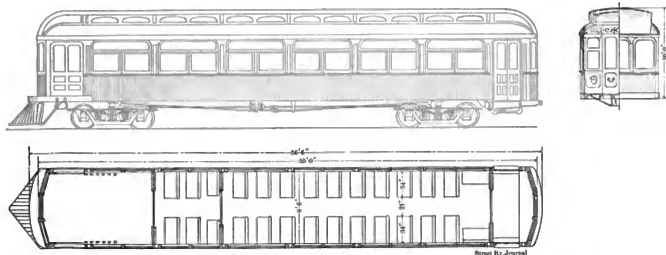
PLAN AND SIDE ELEVATION OF BAGGAGE AND PASSENGER CAR, CANTON & AKRON RAILWAY
